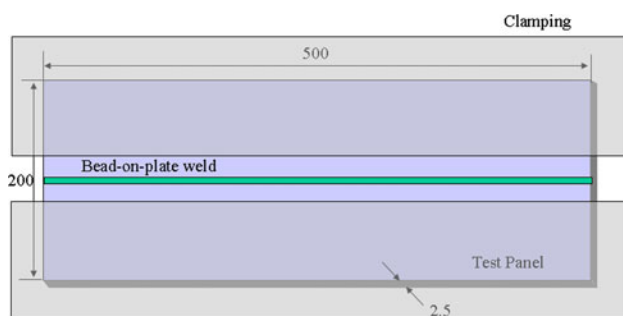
Sketch of TIG welding of thin steel sheet
